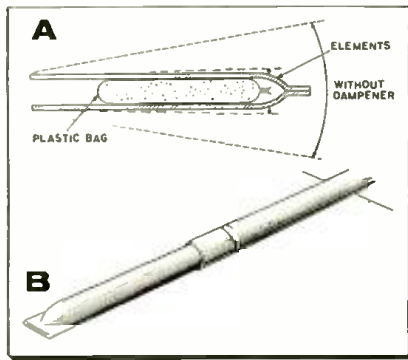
(a) Interior and (b) exterior detail of antenna element showing dampening arrangement
